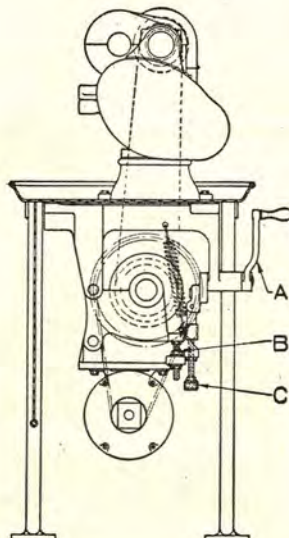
Underneath Motor Drive Arrangement for 10"-1" Collet Bench Lathes
